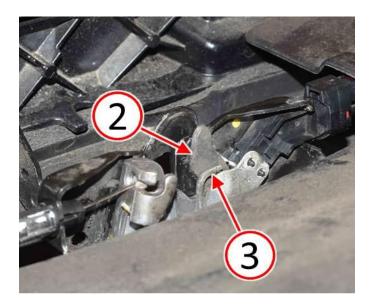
Hood Latch Ratchet and Latch Cover Plate
